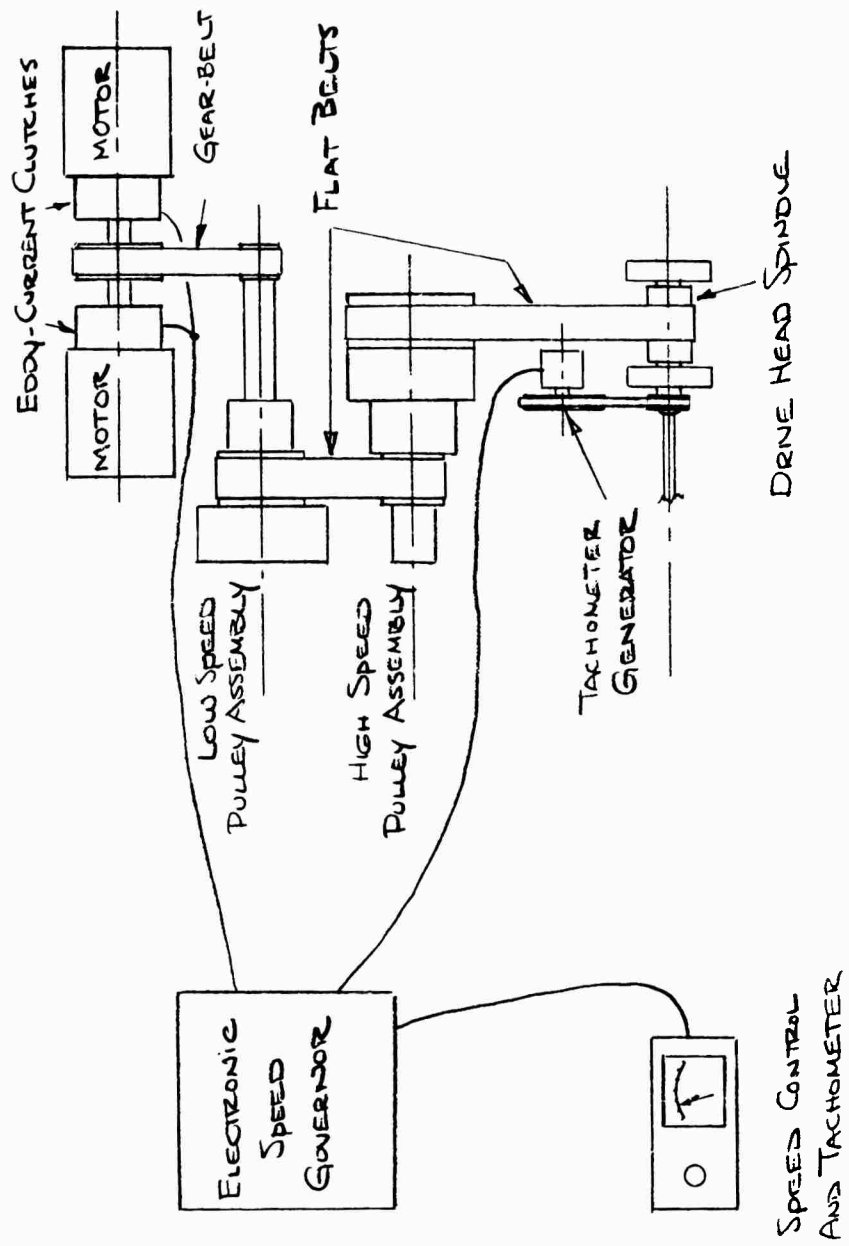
SCHEMATIC DIAGRAM OF TEST-MACHINE DRIVE MECHANISM
